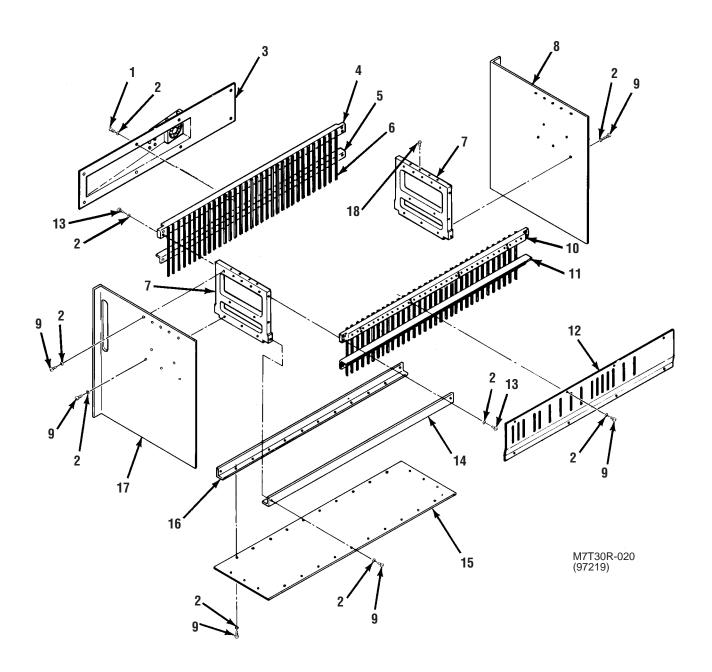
Group 01A010128 Card Cage Assembly 12309897
